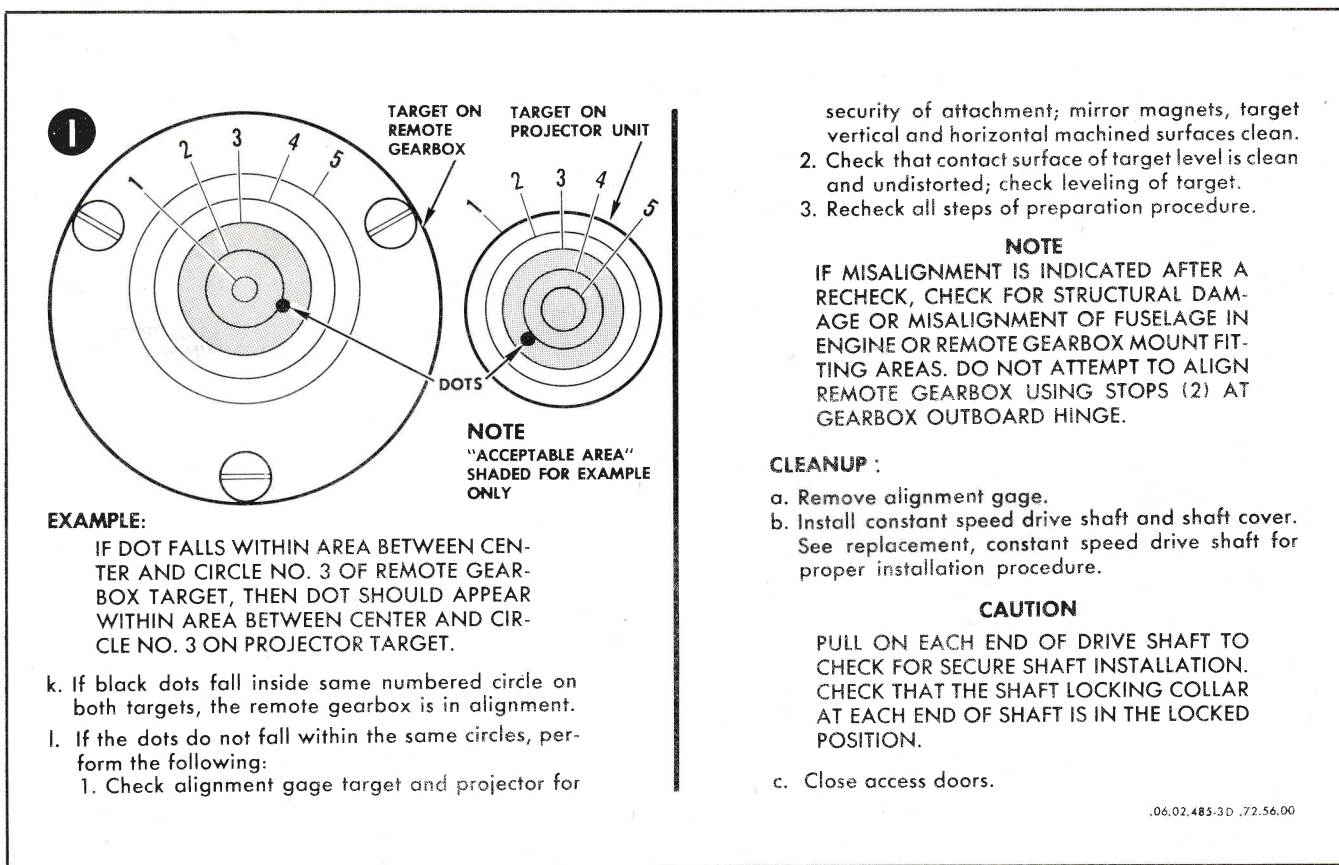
Alignment Check, Constant-Speed Remote Gearbox (Sheet 3 of 3)
